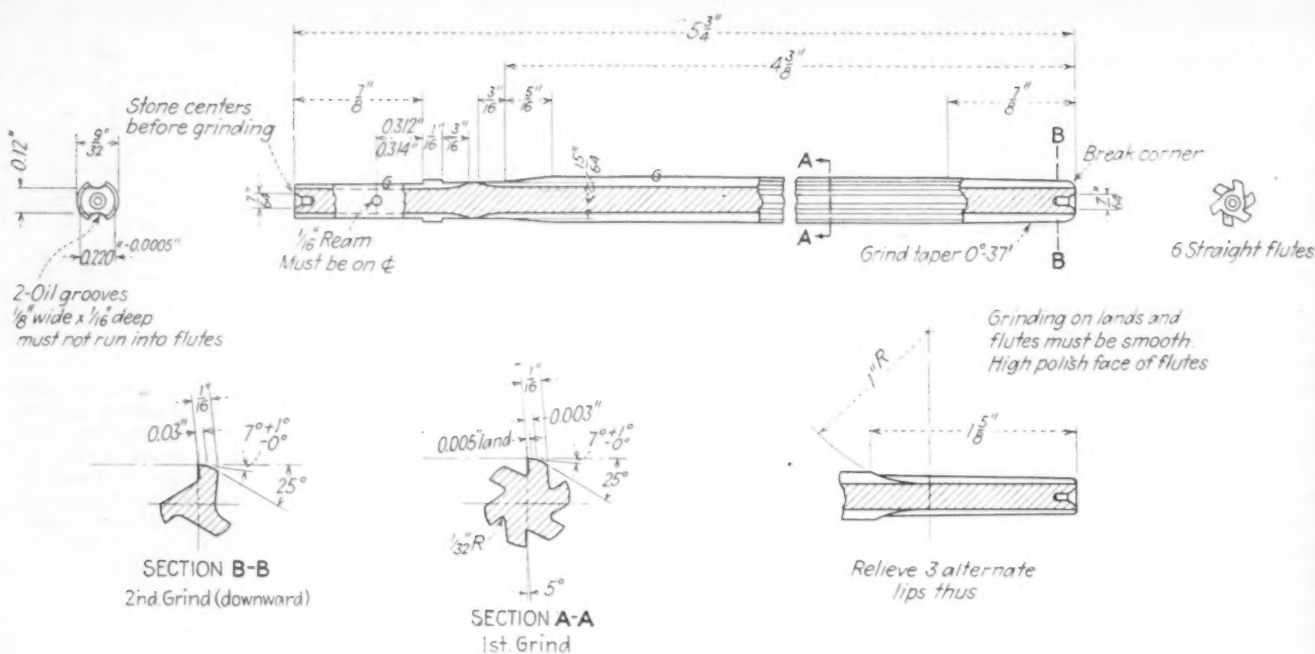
Details of push type reamer. Half the straight flutes are removed for  $1\frac{1}{8}$  in. to give greater chip clearance.
